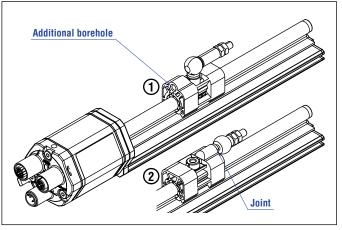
Magnet alignment of magnet slider for RP5 EtherNet/IP™ with internal linearization
